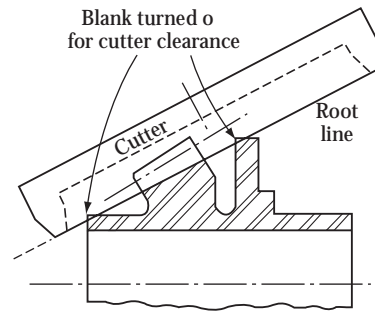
When using Zerol bevel, spiral bevel, and hypoid gears, clearance must be provided for the cutter as shown.
